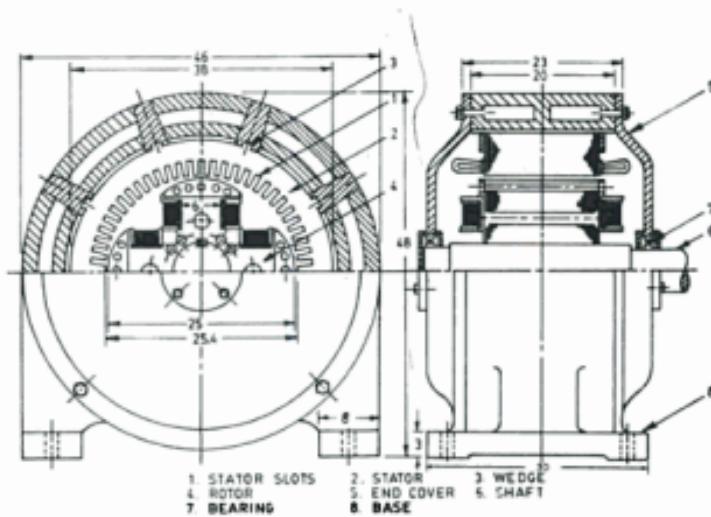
Elevation and end view in half sections of an alternator (Example 4)
